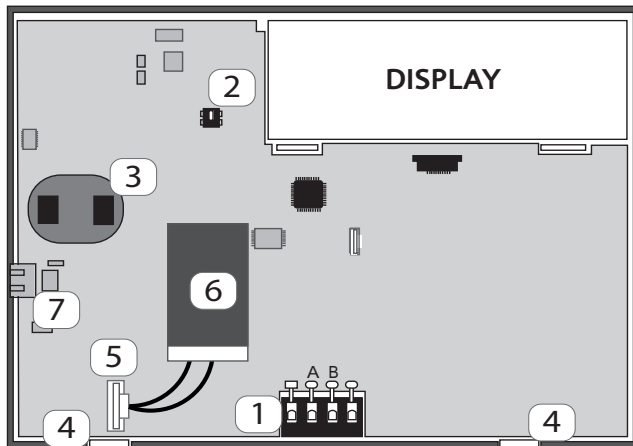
PARTS DESCRIPTION AND PCBA TERMINALS
